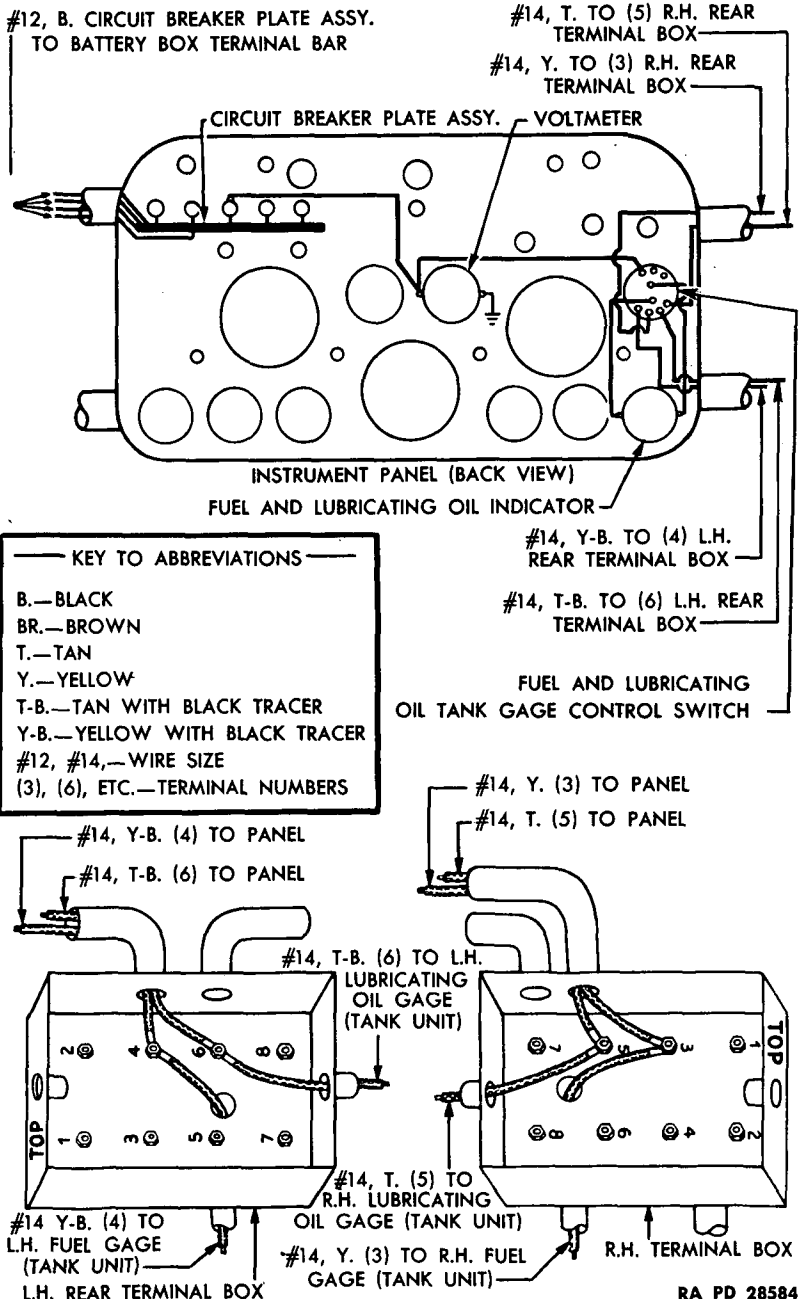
Instrument Panel and Rear Terminal Boxes for M10 Fuel Gage and Lubricating Oil Gage Circuits
